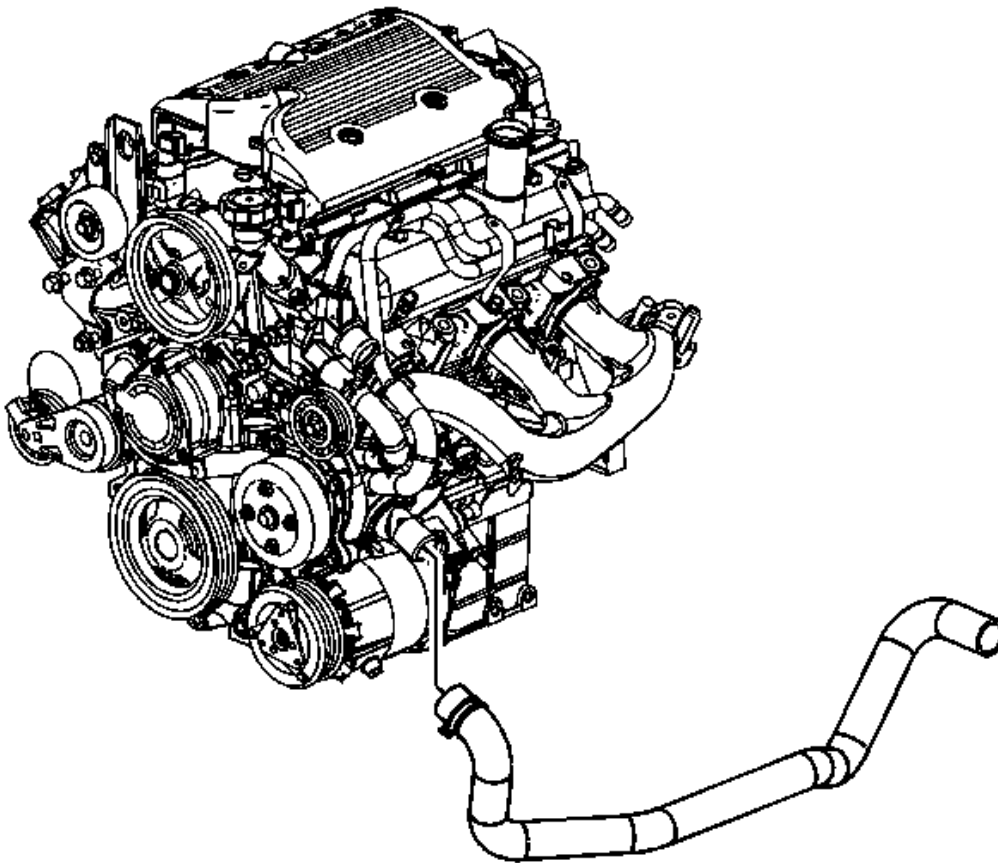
Identifying Radiator Outlet Hose Clamp & Thermostat Housing
